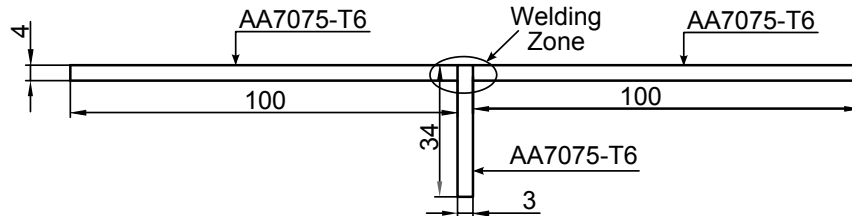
Dimensions of the cross section of welded T-joint geometry.
